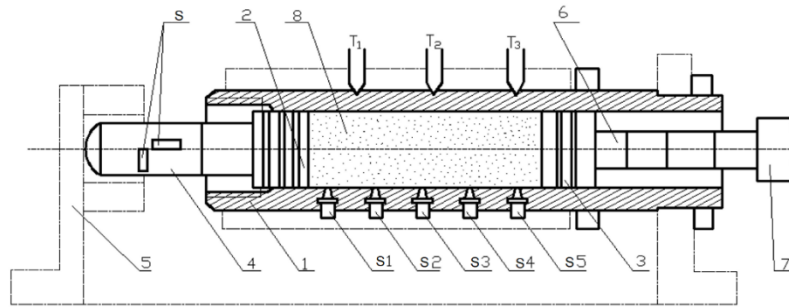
Calibration scheme of pressure sensors: 1—material cylinder; 2—left plug; 3—right plug; 4—assembly rod; 5—mover; 6—rod of the right plug; 7—hydraulic cylinder rod; S1, S2, S3, S4, S5—pressure sensors; T1, T2, T3 — thermocouples; D is a strain gauge for measuring axial force.
